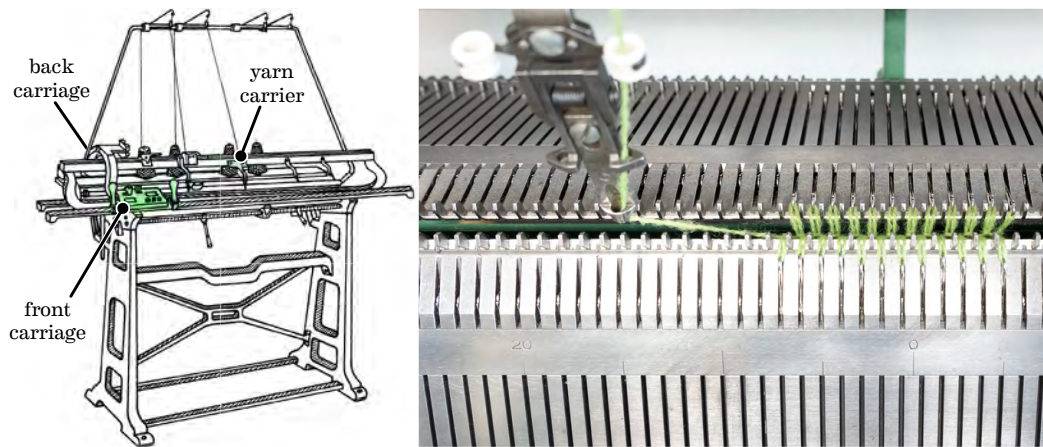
Right: the overall layout of a v-bed manual knitting machine, showing the carriage (Image modified from Wikimedia Commons, [83]). Right: a view of the needle bed and one carrier on my machine.
